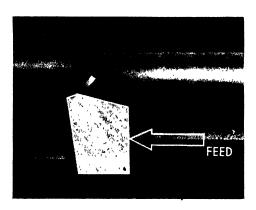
PRIMARY NEGATIVE CUTTING RAKE ADDED TO THE TOOL WITH POSITIVE SECONDARY RAKE (A. C. Wickman, Ltd.)
